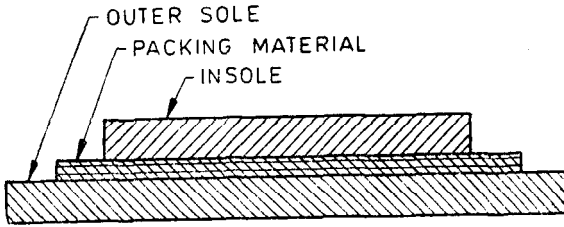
POSITION OF INSERTING THE PACKING MATERIAL
